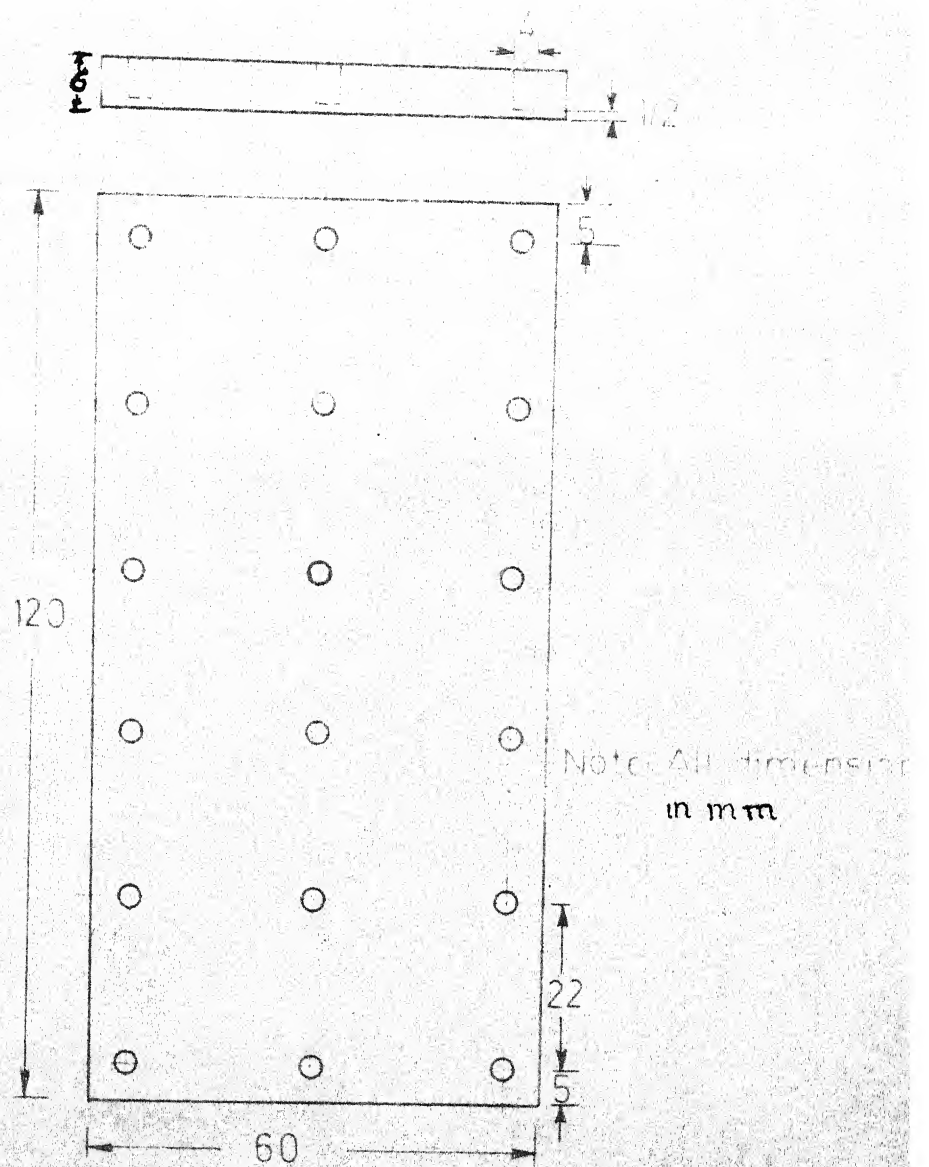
POSITION OF THERMOCOUPLES ON THE TEST PLATE
